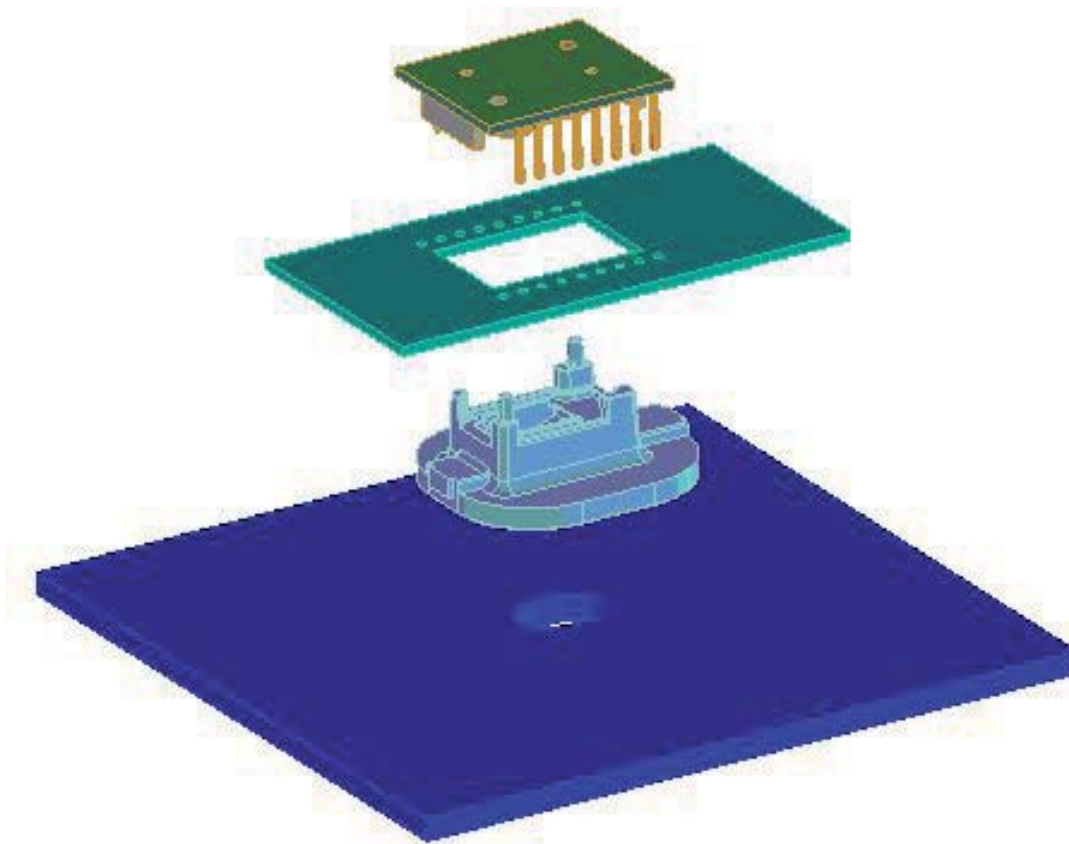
Exploded view drawing of ADNS-9500 sensor coupled with ADNS-6190-002 lens, PCB & base plate
